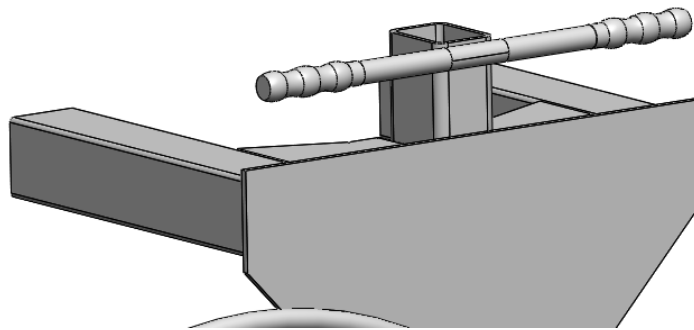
Handle Bar on Welded Side Arm tubing [12].
